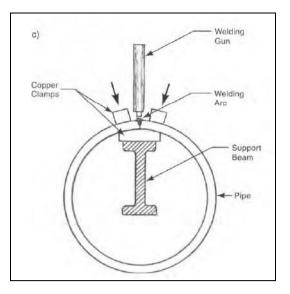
Typical arc welding arrangement for large diameter LSAW pipe
